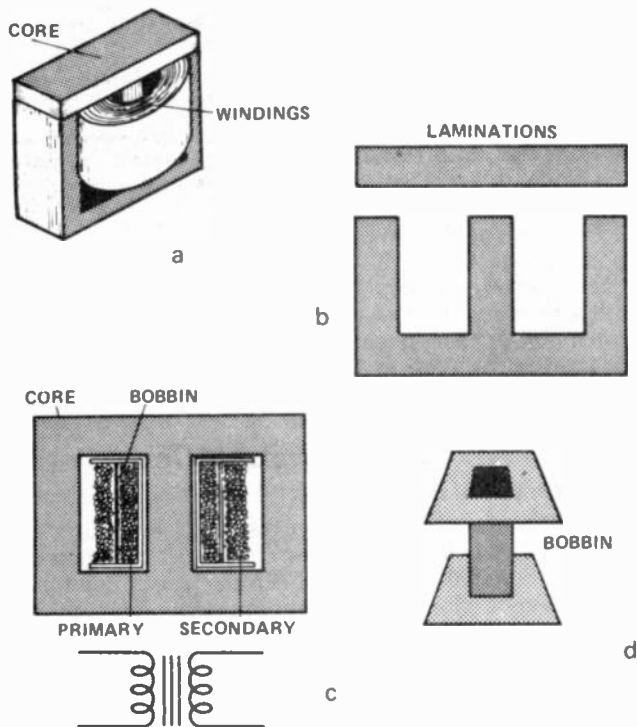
The transformer. a) General appearance, b) Core and bobbin, c) Sectioned view, d) Symbol.
